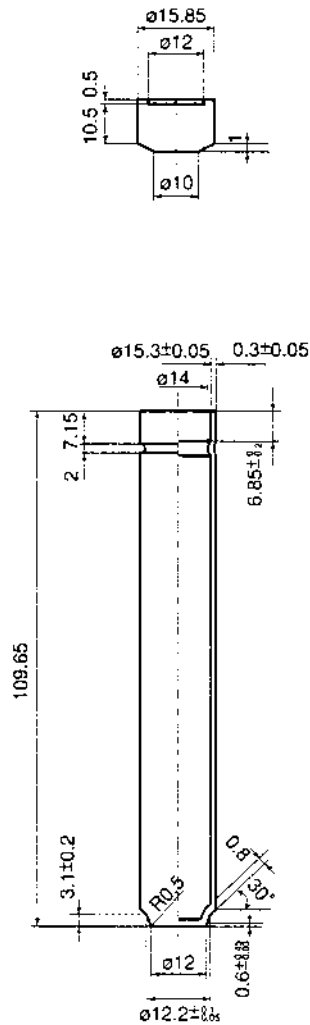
Housing of maker pen. Top: Billet, Bottom: Drawing of housing.
